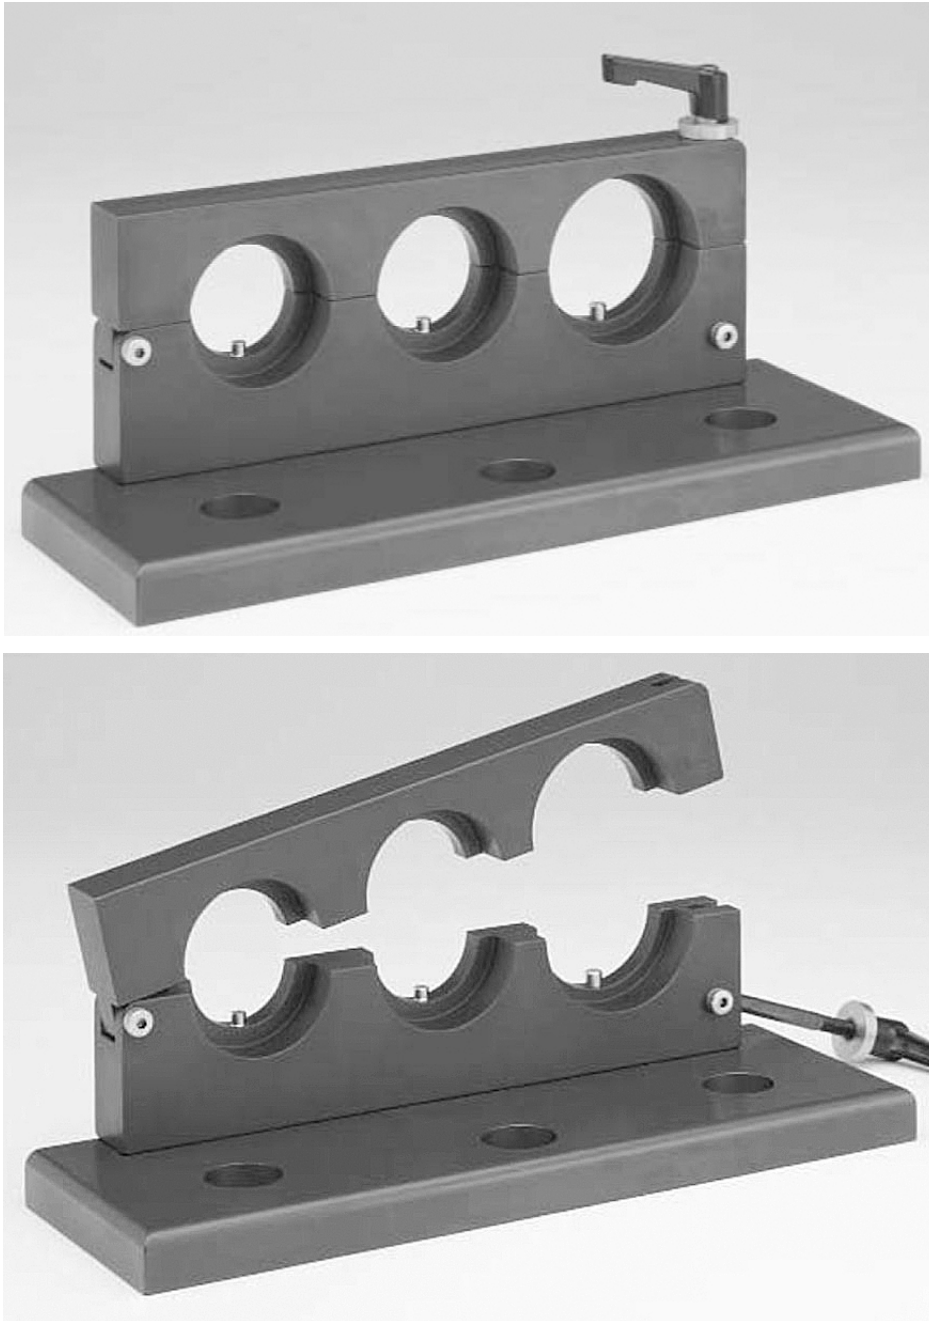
Sleeve AssemblyTable 4.26 Sleeve assembly
